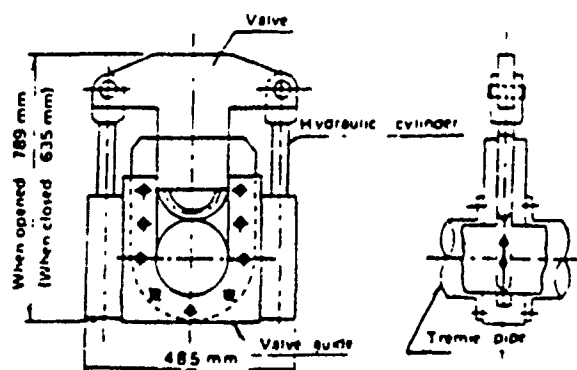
KTS-1 Tremie Device and Crushing Valve
